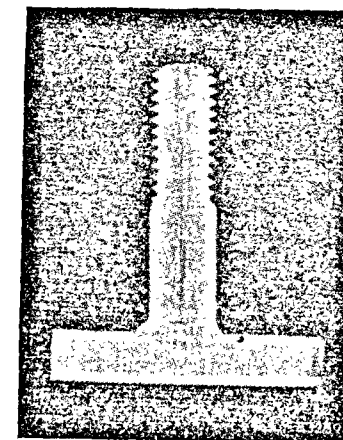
Cross-section of a $\frac{3}{8}$ inch stud welded to a plate by the cartridge method of stud welding. The slag enclosures revealed by etching show that the stud and the plate are both made of rimmed steel.
